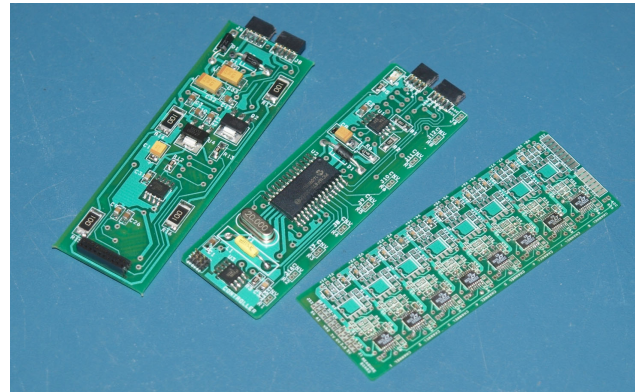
Partially assembled printed-circuit boards of the digitizing module
